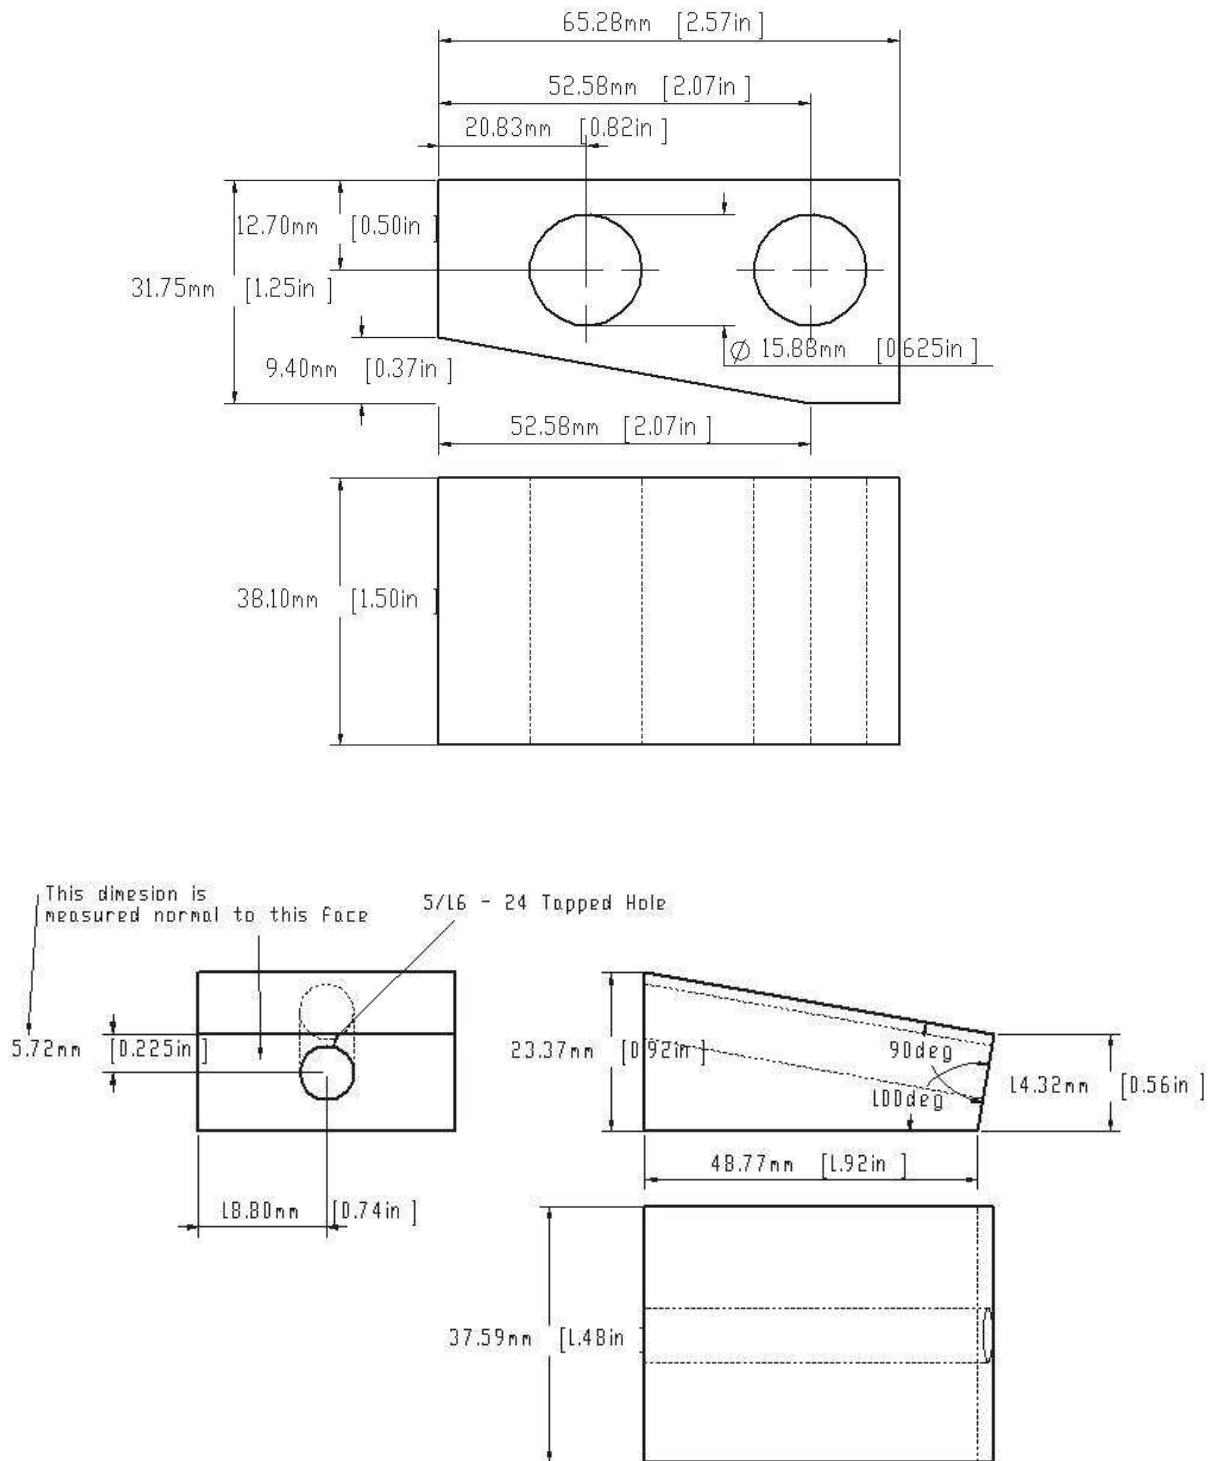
Drawings of the middle, angled pieces (top, 2 required) and the top edge-loading pieces (bottom, 2 required)
